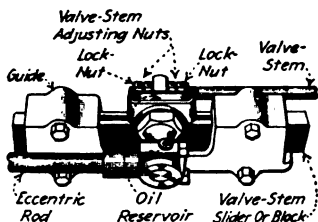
Valve-stem adjustment at the valve-stem slider. (Chuse engine & Mfg. Co.)
